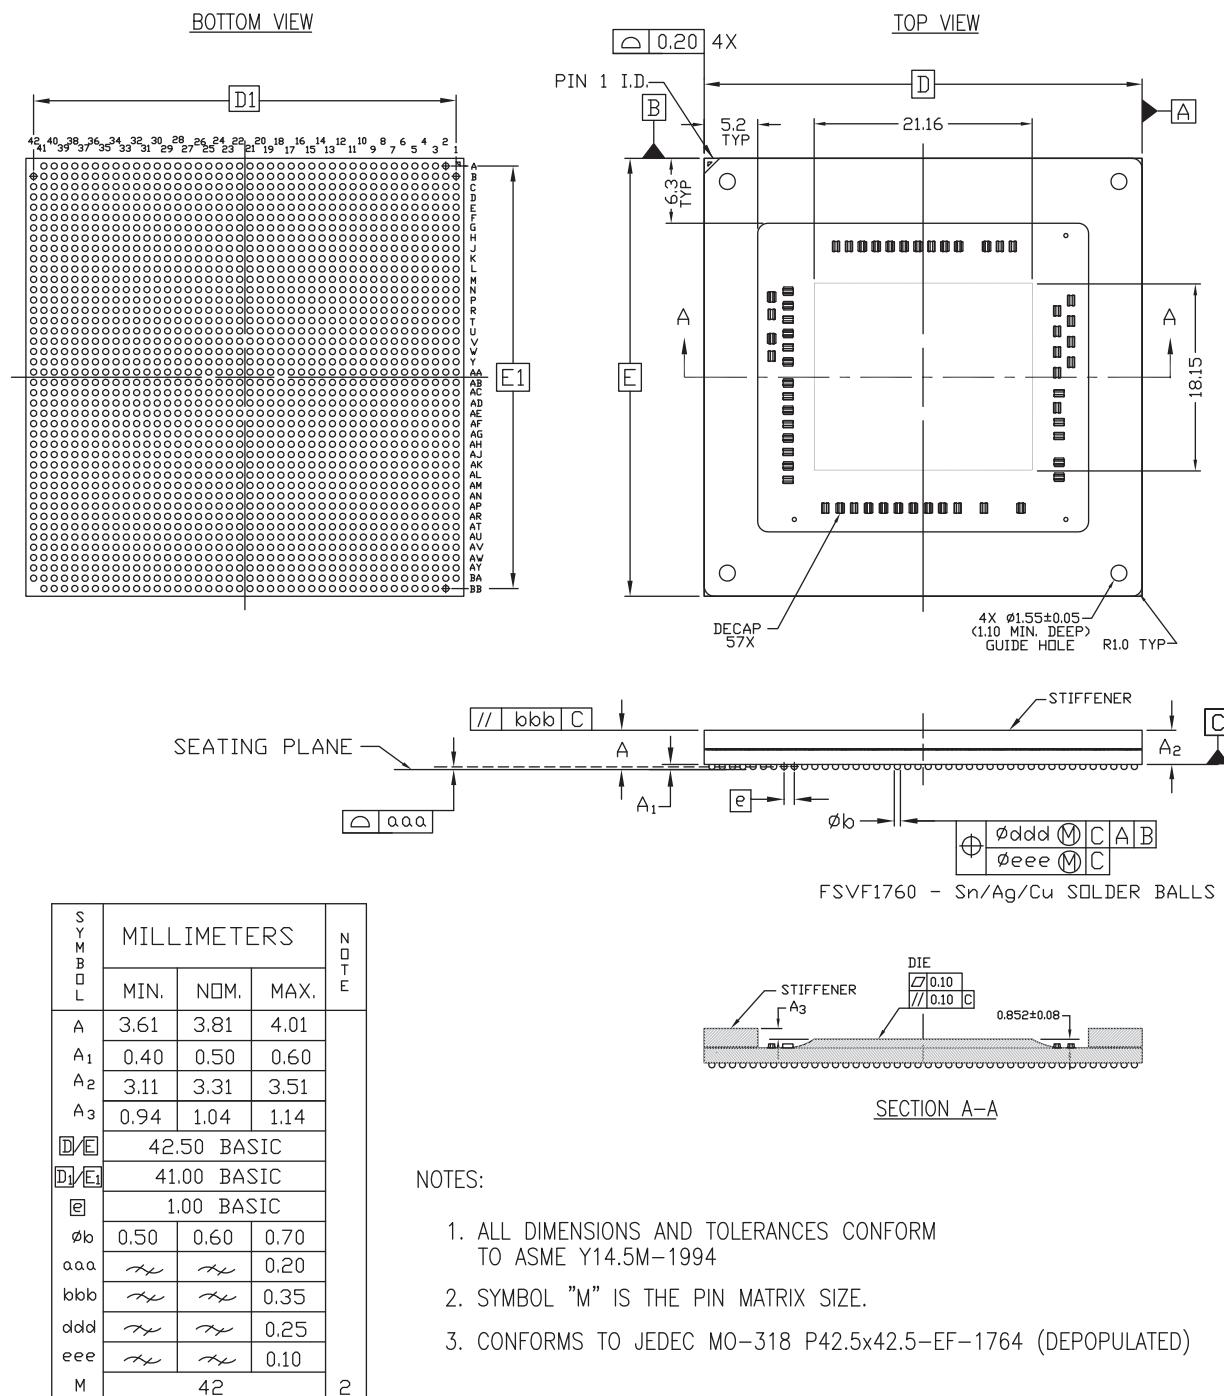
Package Dimensions for FSVF1760 (XCZU29DR)
